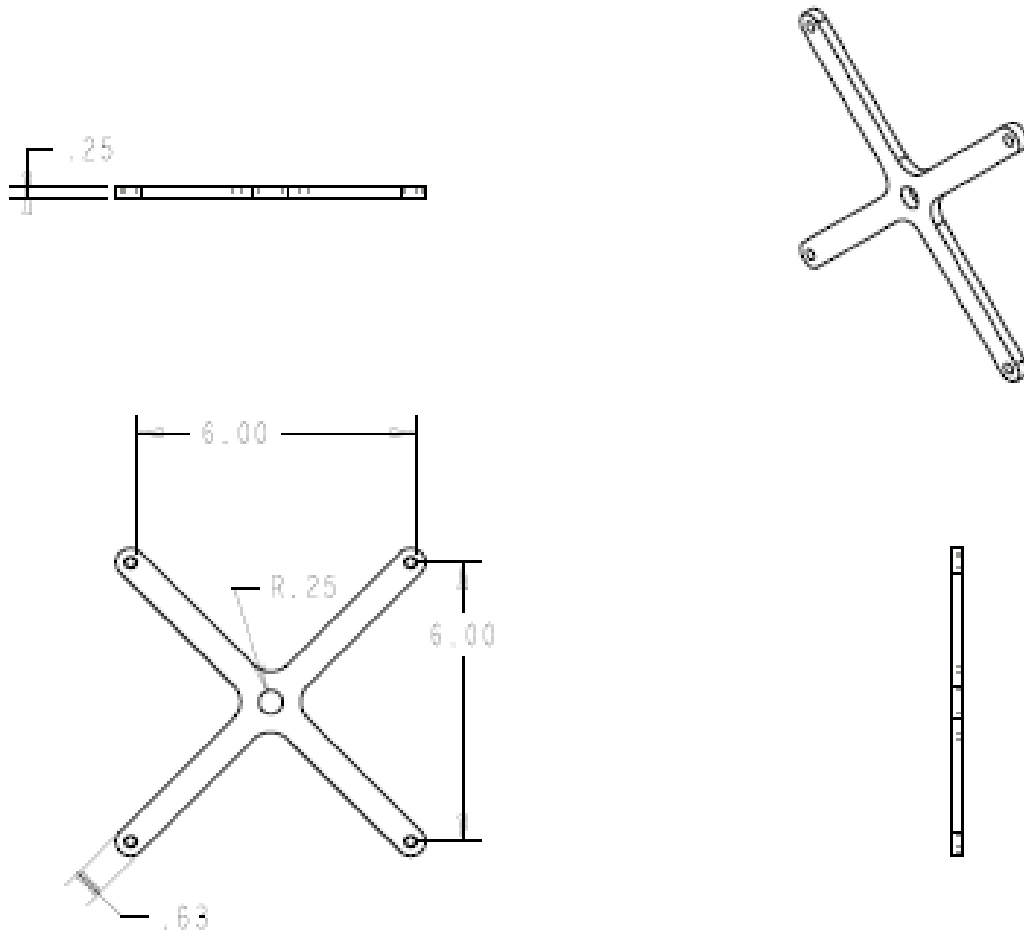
Solar Assembly Attachment Cross Member Drawing
